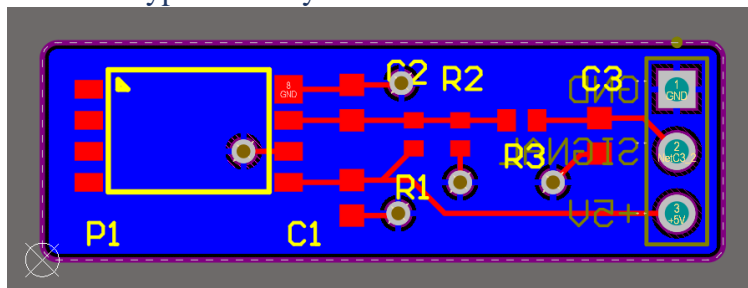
Pressure Sensor Prototype PCB Layout in Altium
